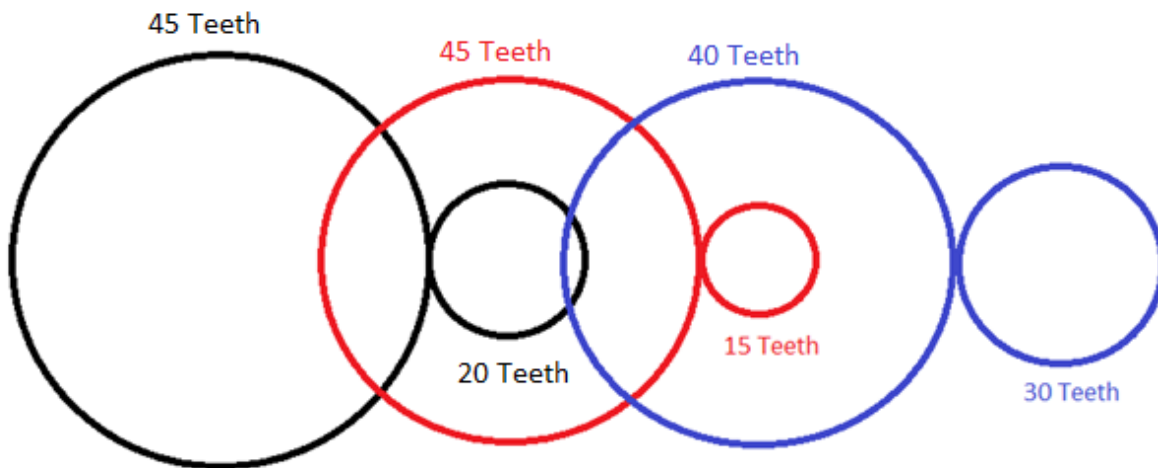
Configuration of the gears in the gearbox. Gears of the same color are meshed together and concentric gears are on the same axle.
